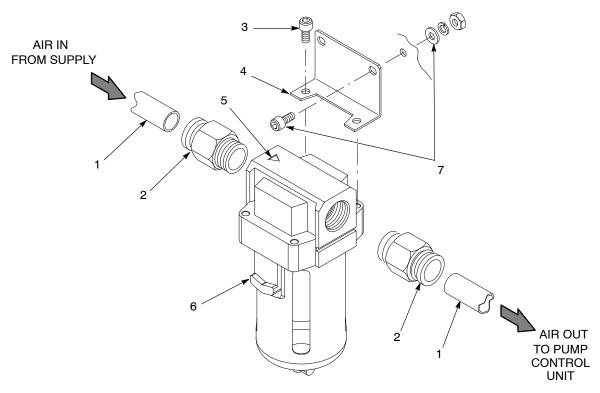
Air Filter Installation – Standalone and Rail/Wall Mount Systems
